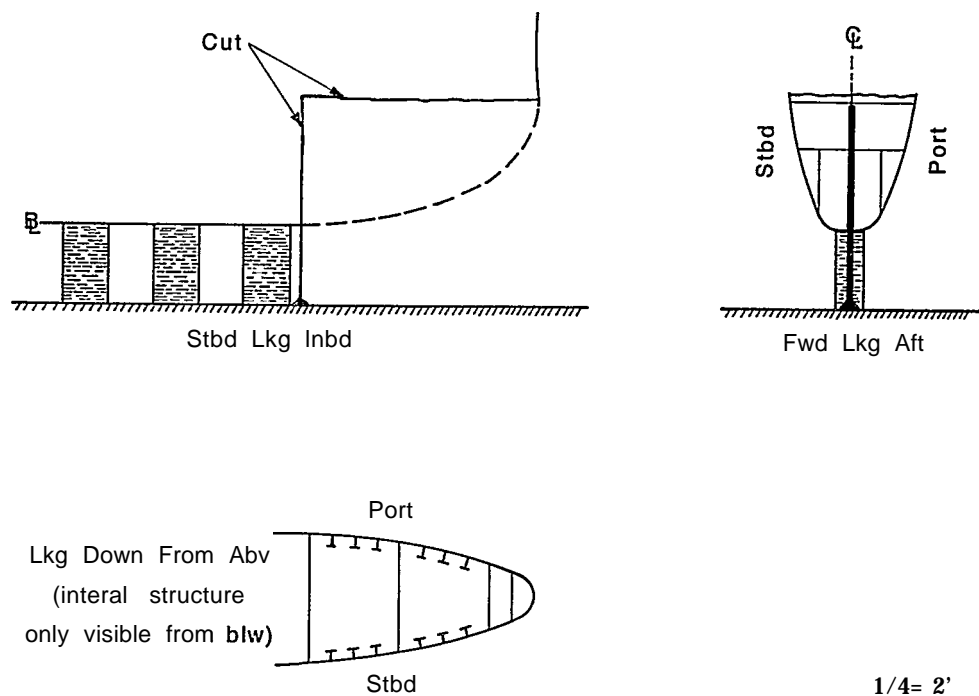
DAMAGED KITTY HAWK BOW SECTION
